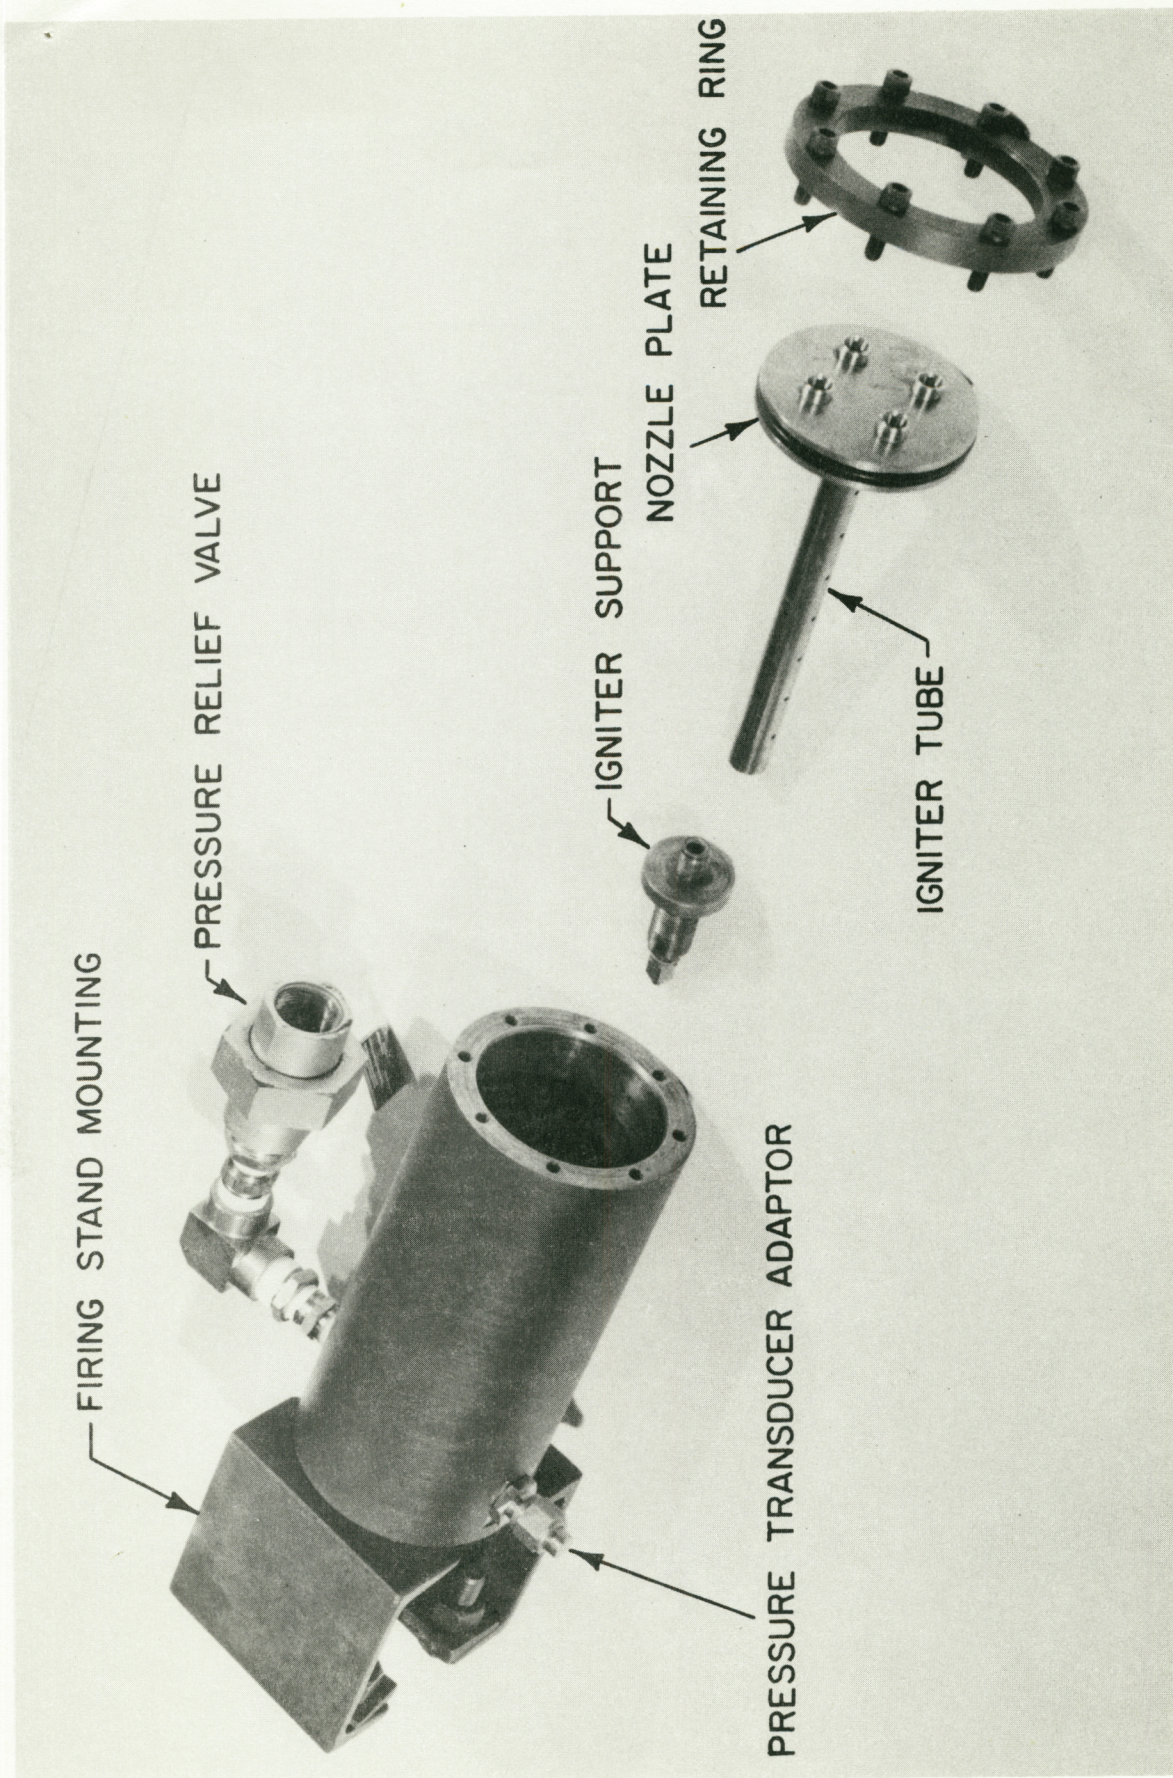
EXPLODED VIEW OF FRANKFORD ARSENAL COMBUSTOR
